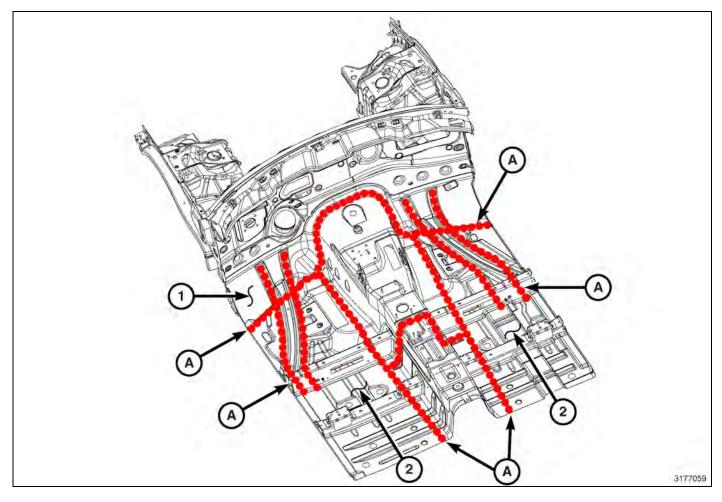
Dash/Front Floor / Tunnel (1 of 2)
